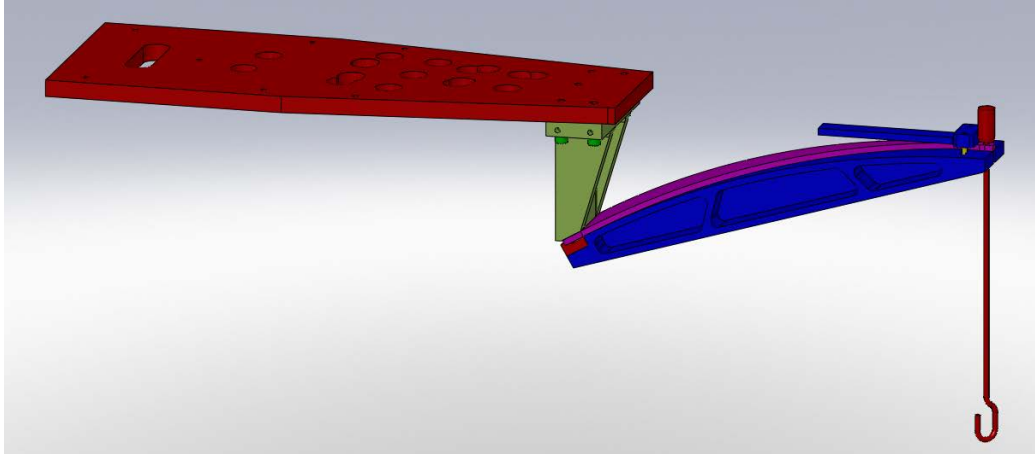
D1200140: ITM Elliptical Baffle Blade Assembly in Bending Configuration
